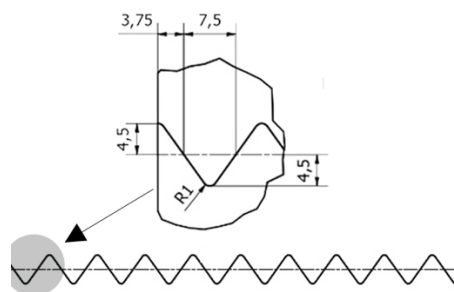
Zig-Zag’ welding path and details about its geometrical parameters [mm].
